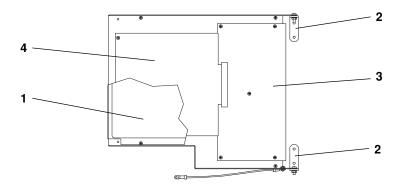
HT2000LHF Power Supply – THC Assembly
